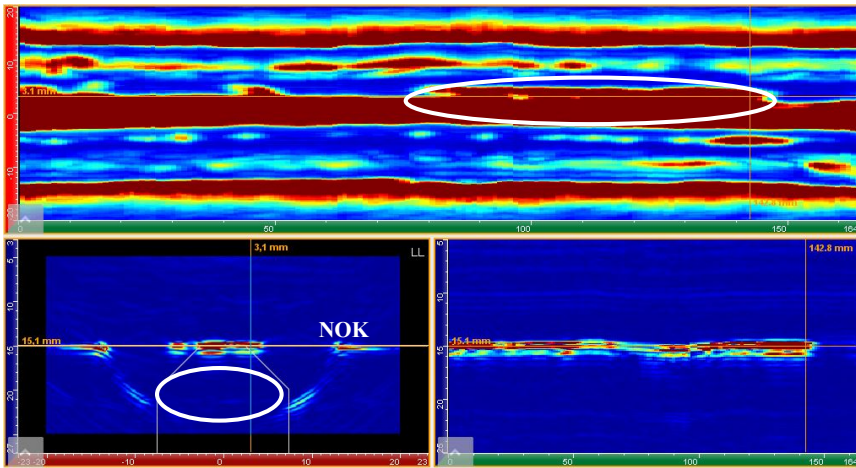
C-scan with TFM and D-scan of a weld section with enlarged disbonding.
